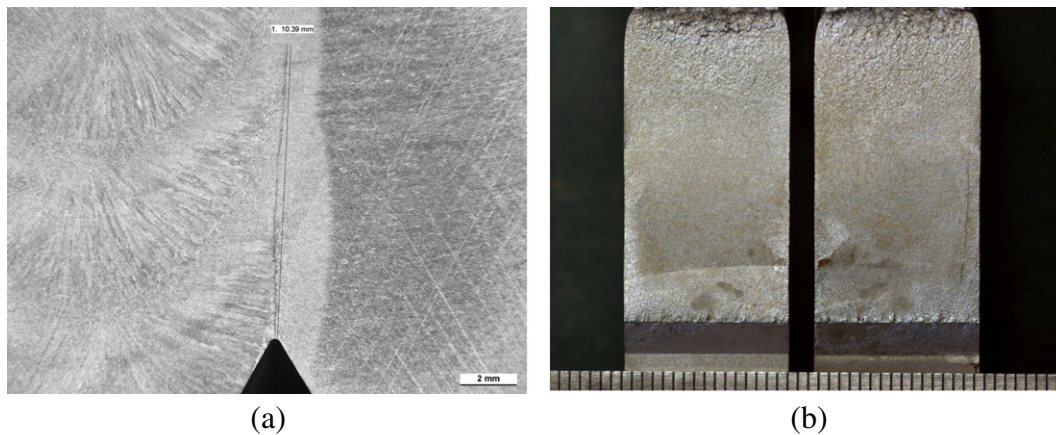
(a) The crack path in a FCG test performed on HAZ specimen (b) Picture of a fracture surface.
